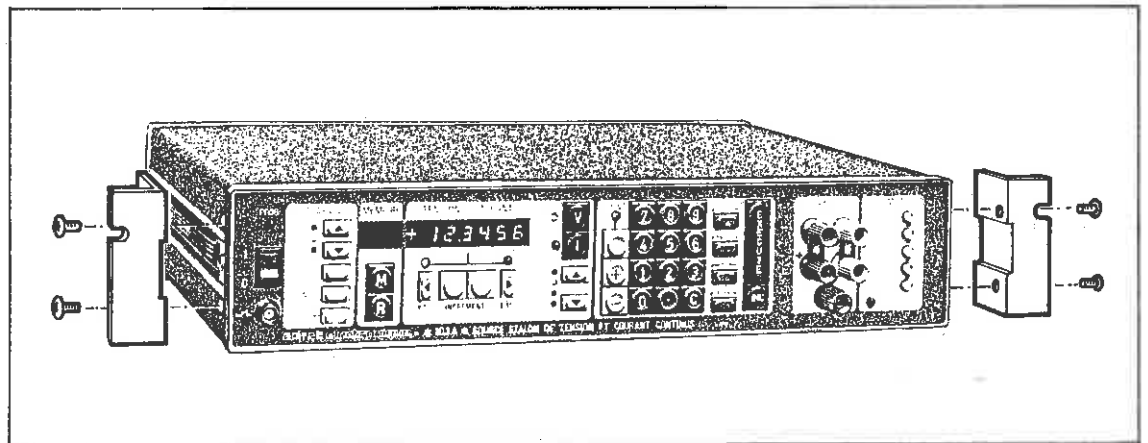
MOUNTING THE 103 IN A 19-INCH RACK
